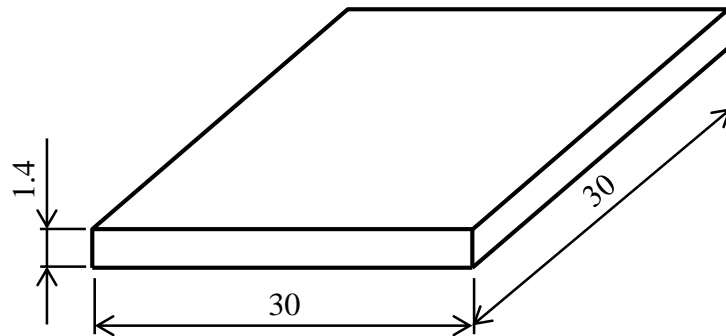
Dimension of specimen for thickening of hole edge.
